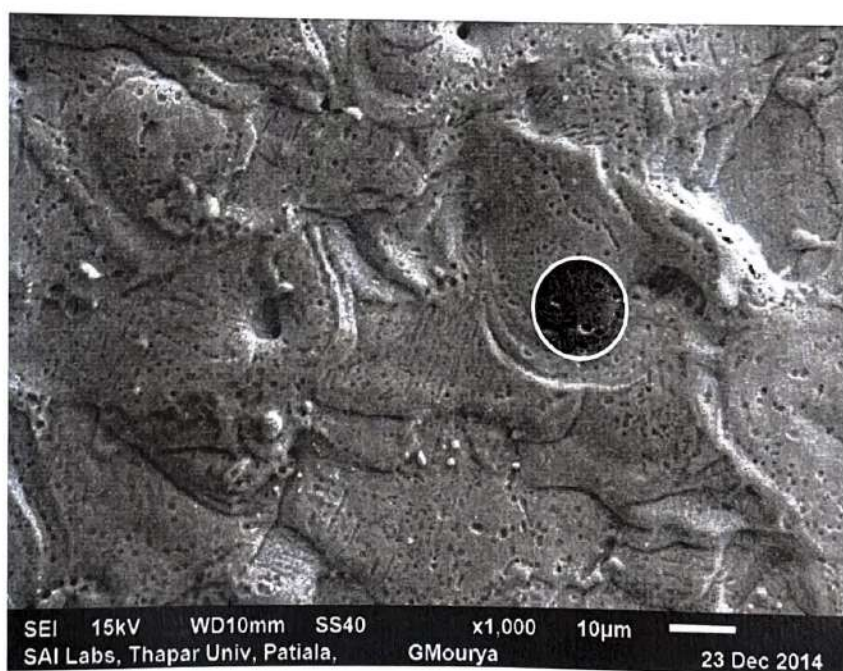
SEM Image of Machined Surface after Trim Cut (Without Metal Powders)
